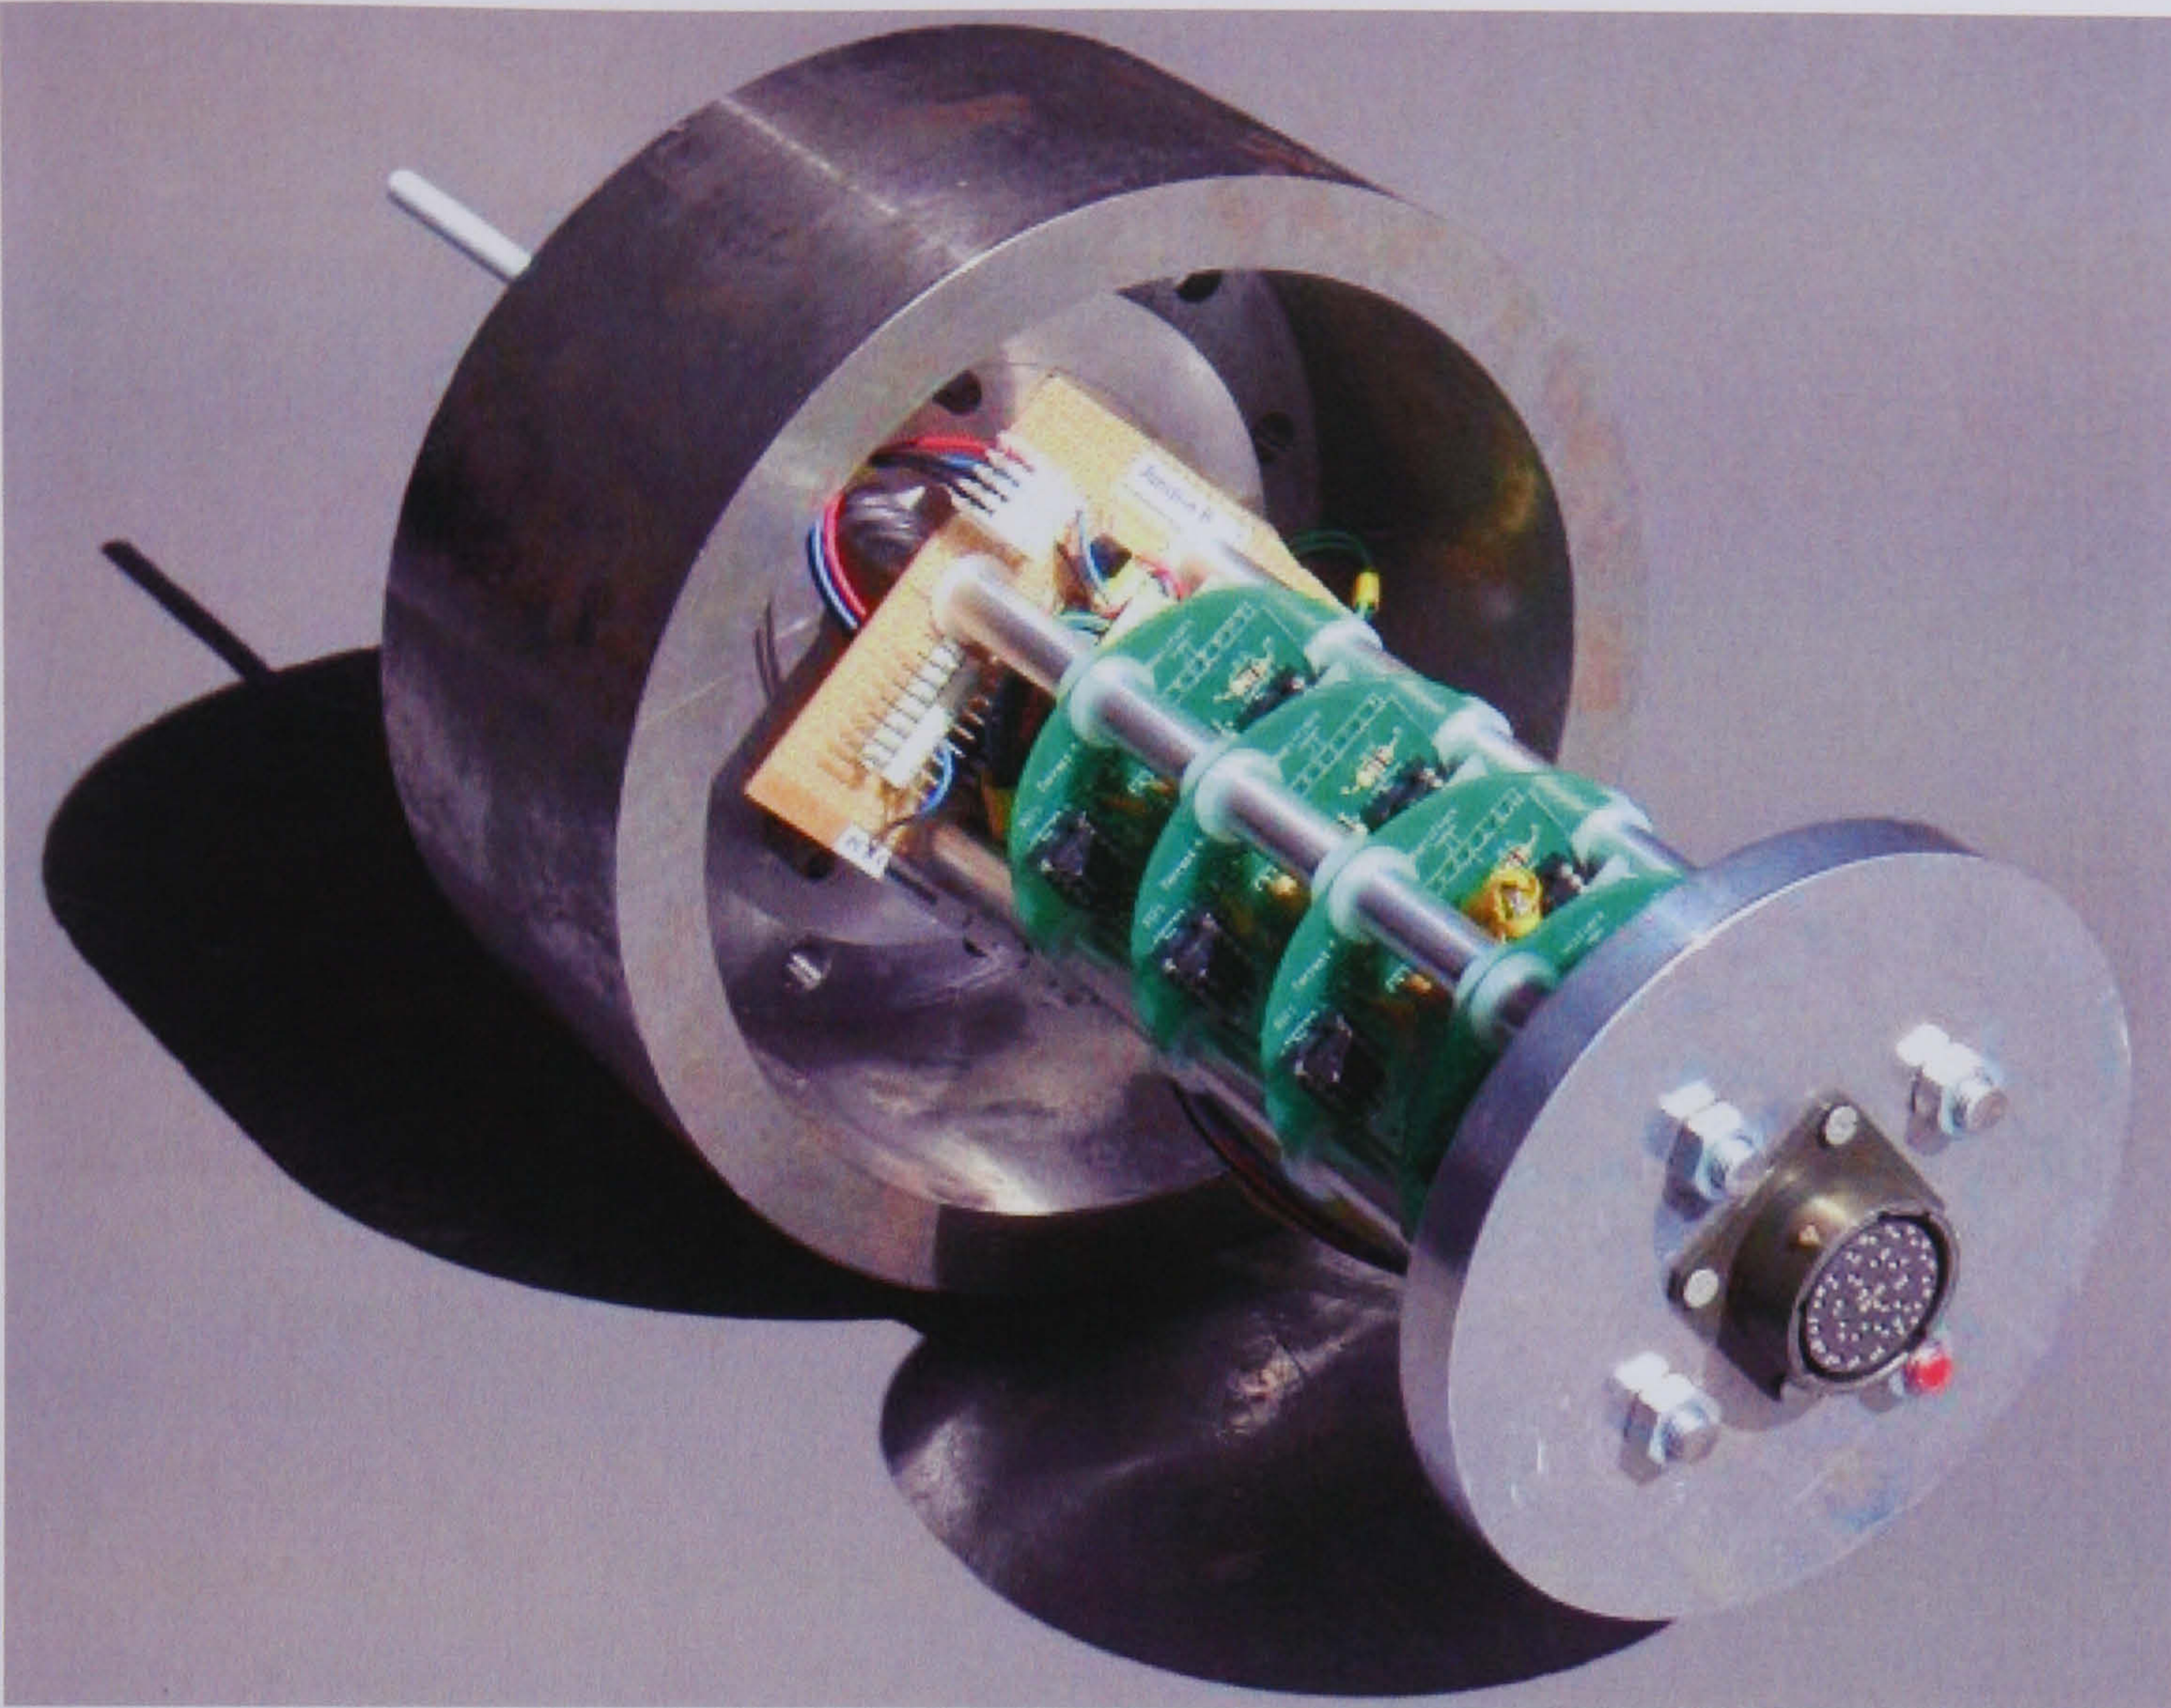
PCB Mounting Cage with PCBs in Place: Assembly Illustration
